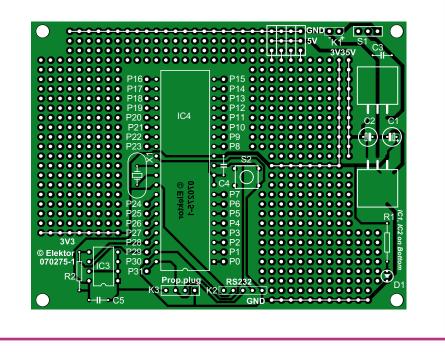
The board layout is single-sided. If you expect to use the prototyping area a lot then a double-sided through-hole plated version would be preferable.
